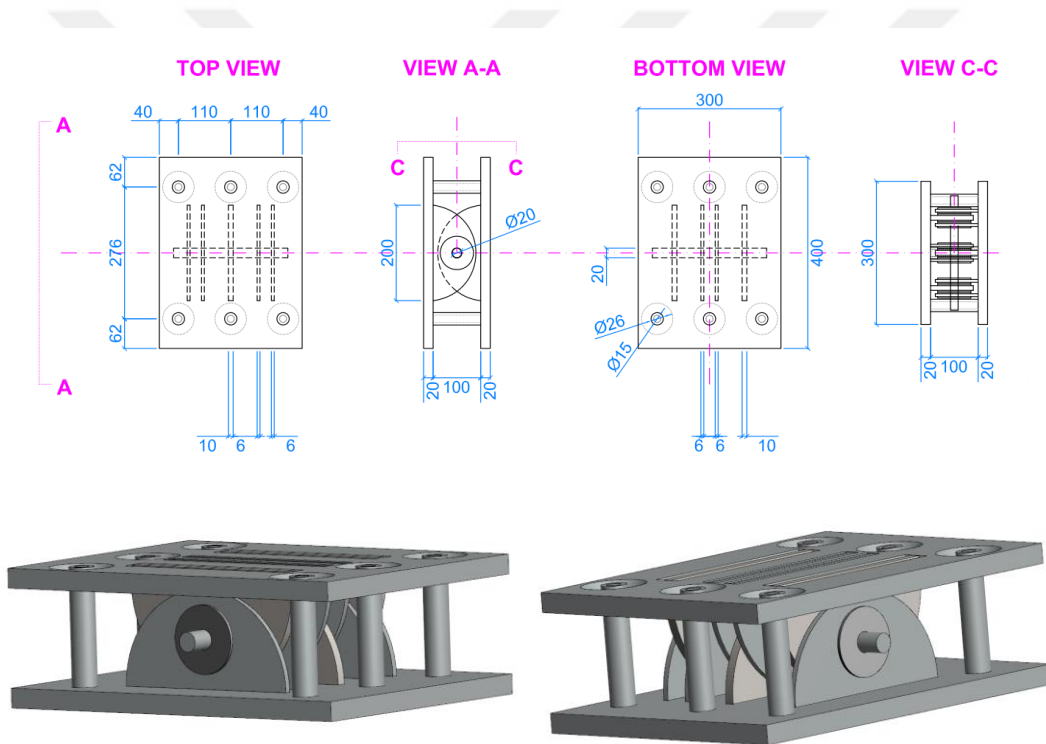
2D and 3D drawings of PT1. Dimensions in mm.
